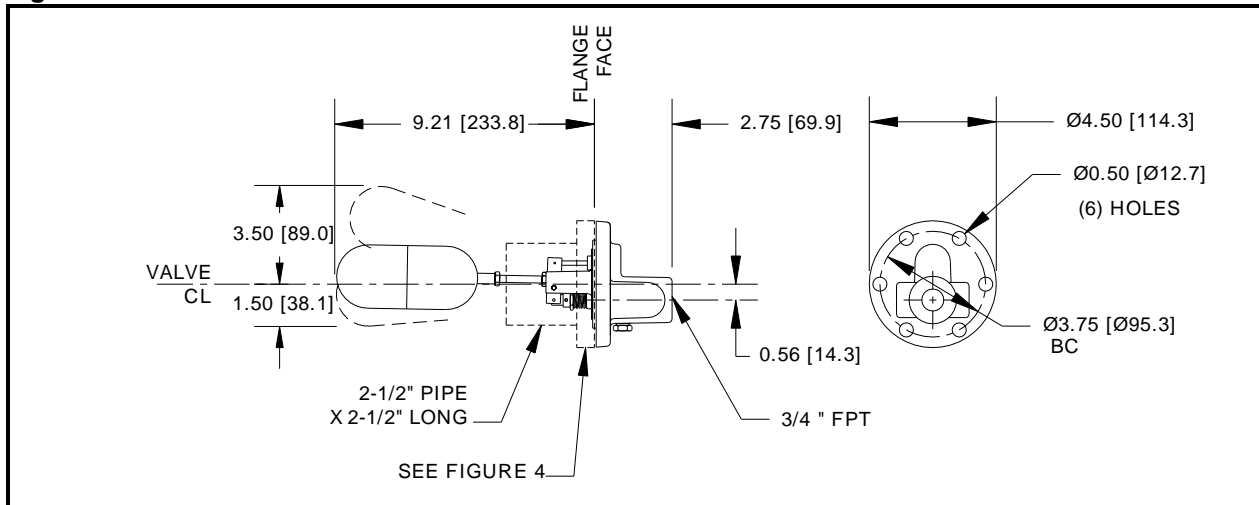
270AX/AY Valve with Cast Iron Chamber
